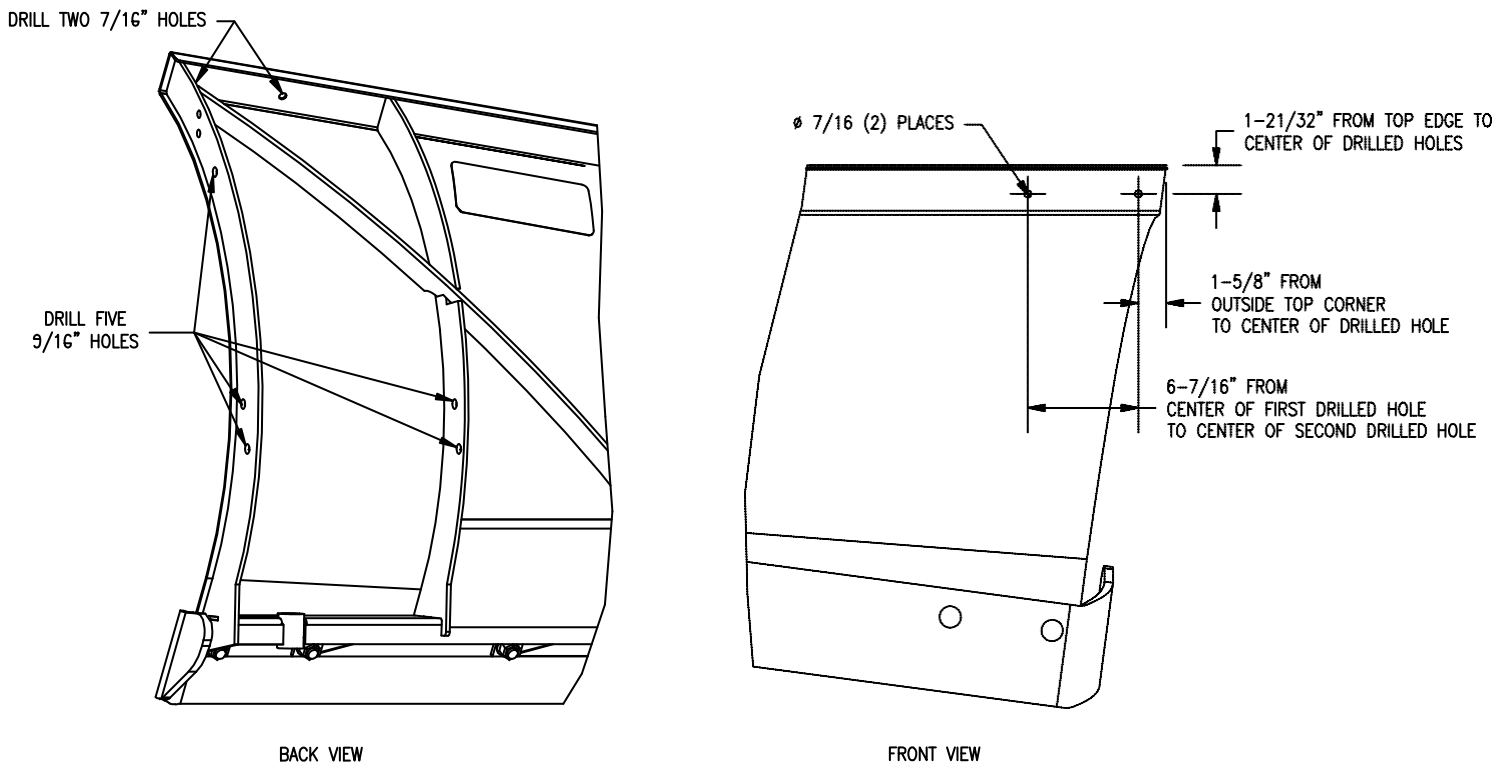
Blade Top Drilled Hole Measurements (INSIDE TOP POLY-V HOLES ARE PRE-CUT)
